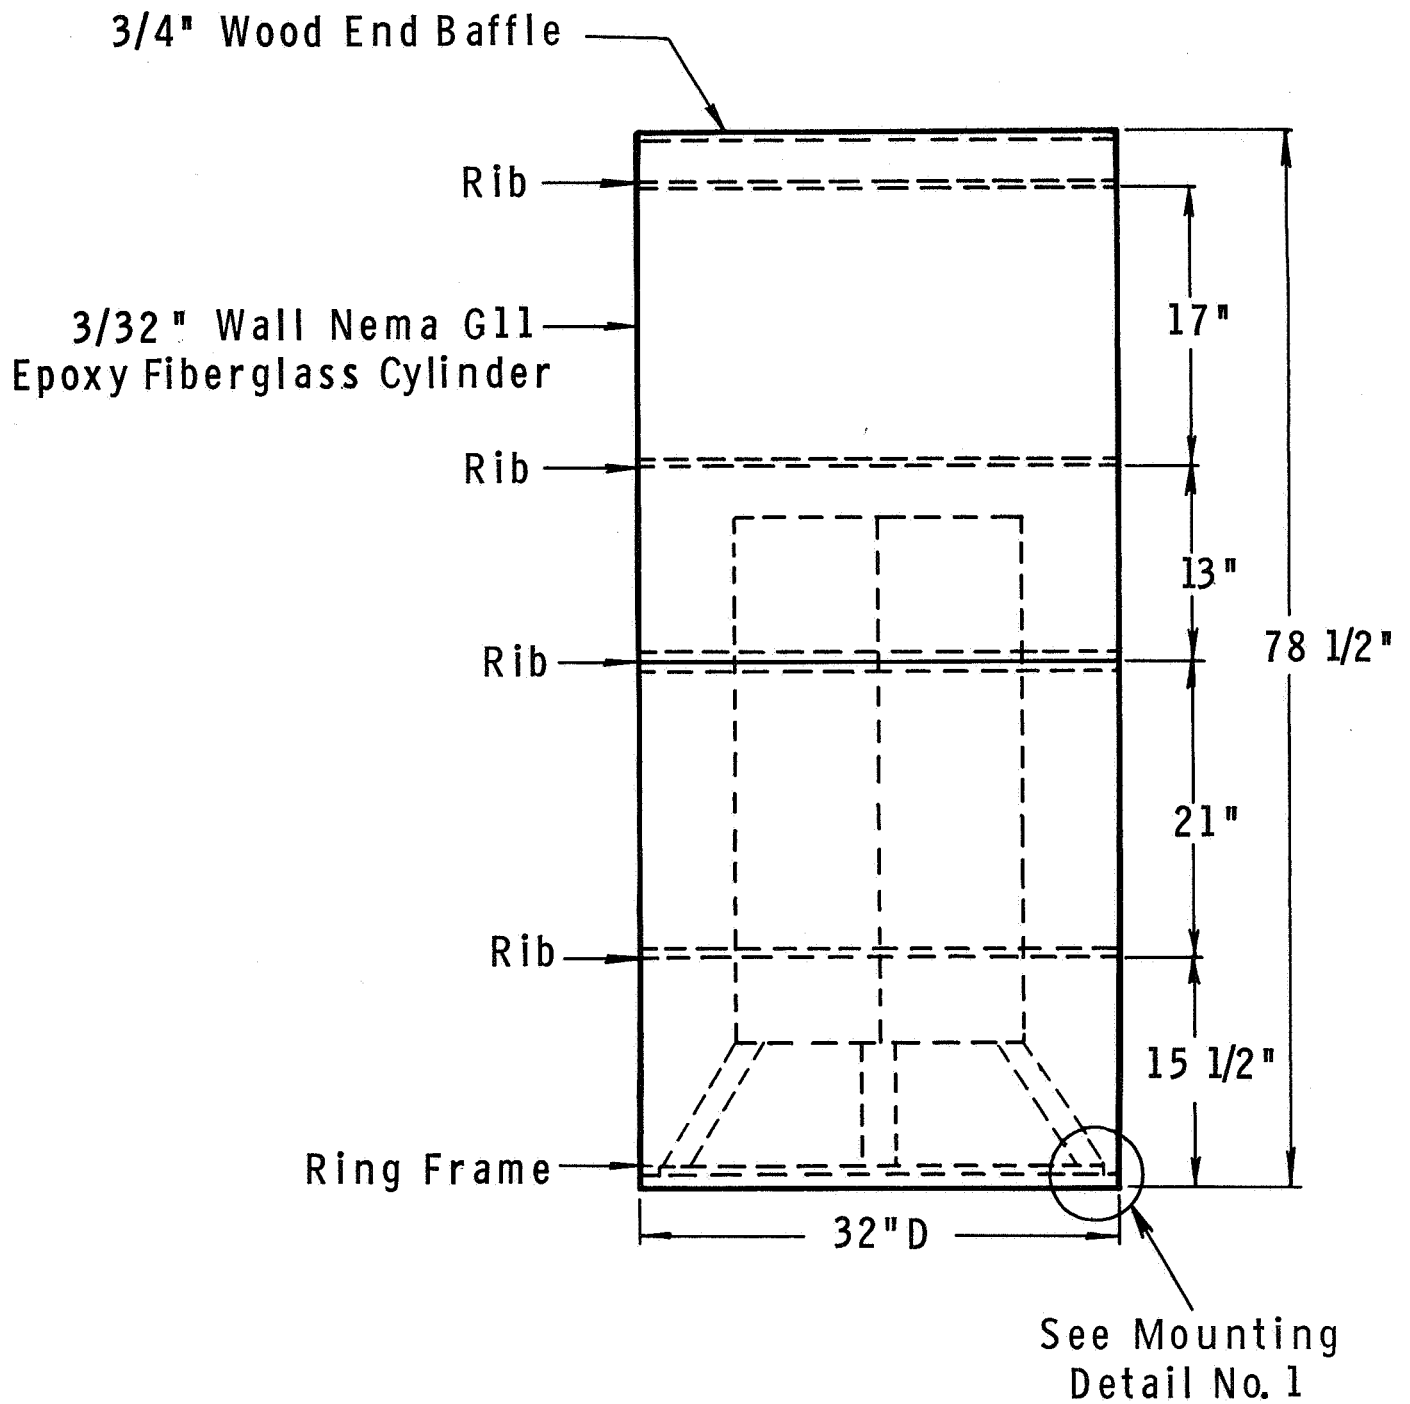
MODEL-SPACECRAFT - SHROUD ASSEMBLY
